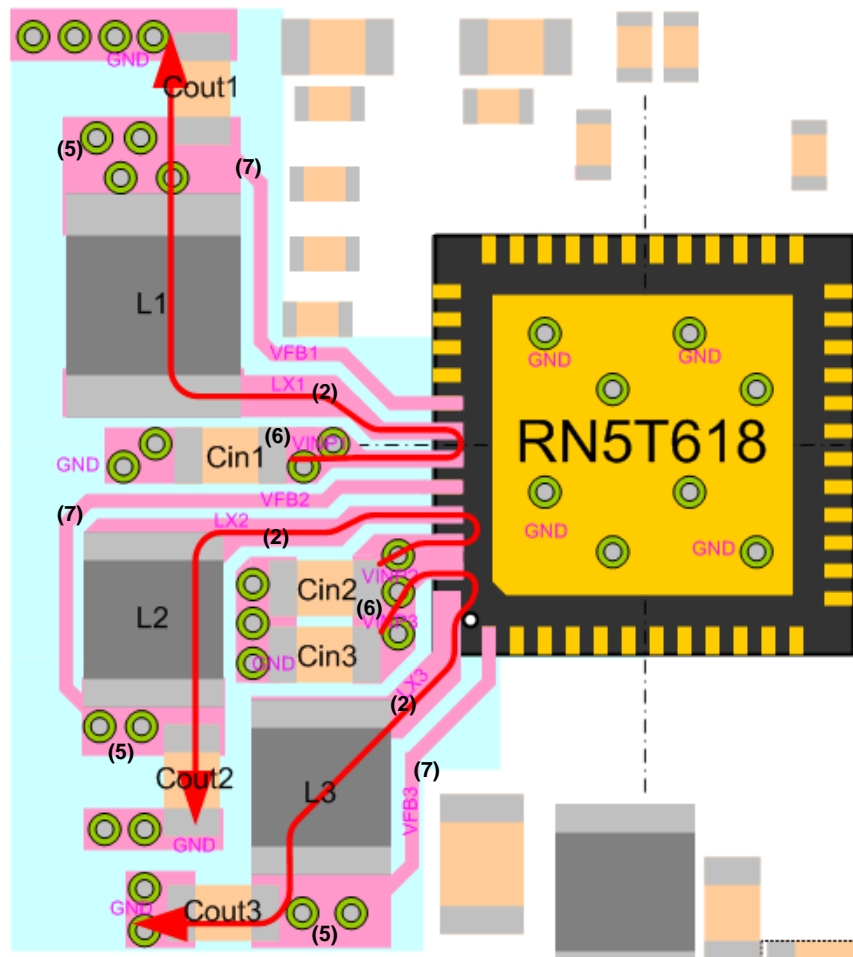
Example of DCDC Block Board Pattern (Top Layer)
